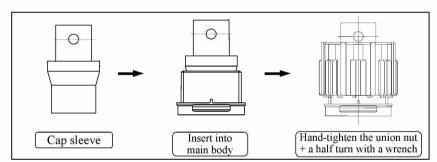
Installing the cap sleeve (6 - 25, W2 - W8)
